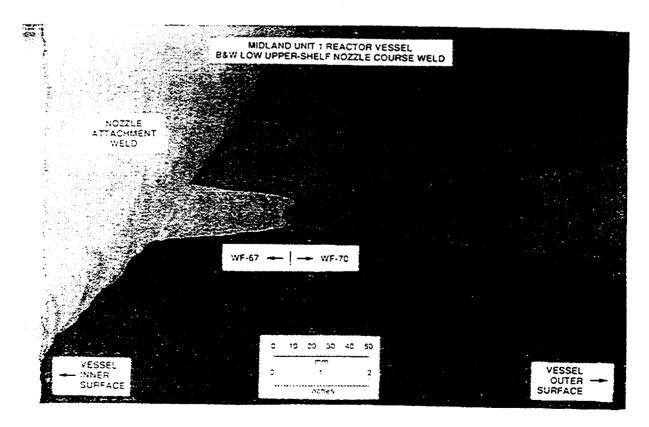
Nozzle course double-V weld showing WF-67 and WF-70 weld halves.
